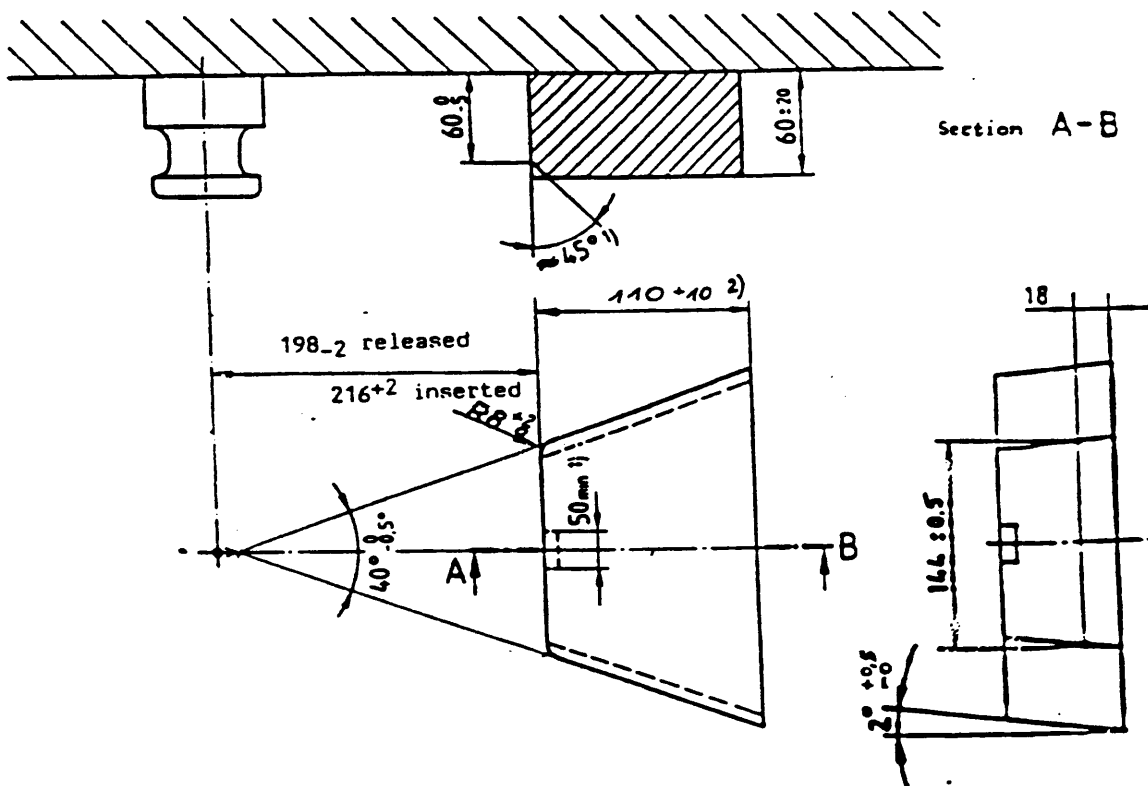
Dimensions of standard fifth wheel couplings (see Table 7)
